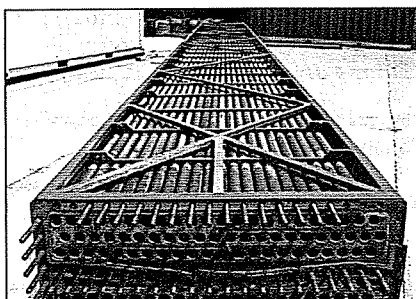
Large hydrogen cooler bundle prior to refurbishment
